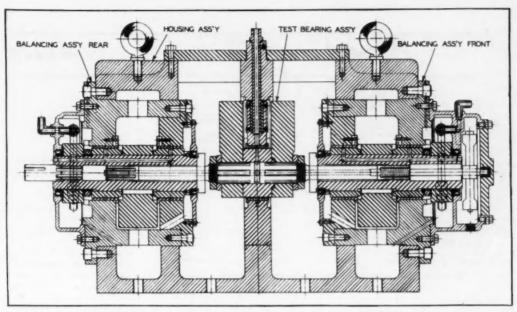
Longitudinal section showing the housing assembly, test bearing assembly, and balancing assemblies
